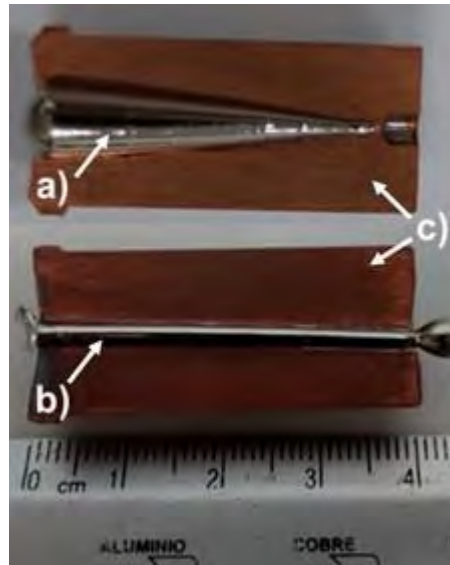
Conical and cylindrical ingots obtained from suction casting; a) conical sample, b) cylindrical sample, c) Cu mould.
